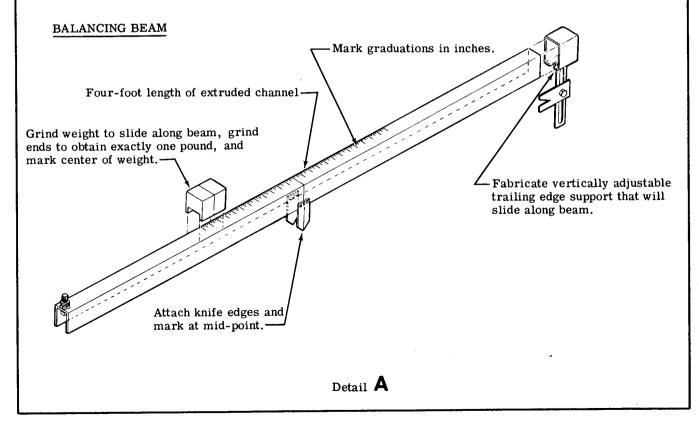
Control Surface Balancing (Sheet 2 of 5)
